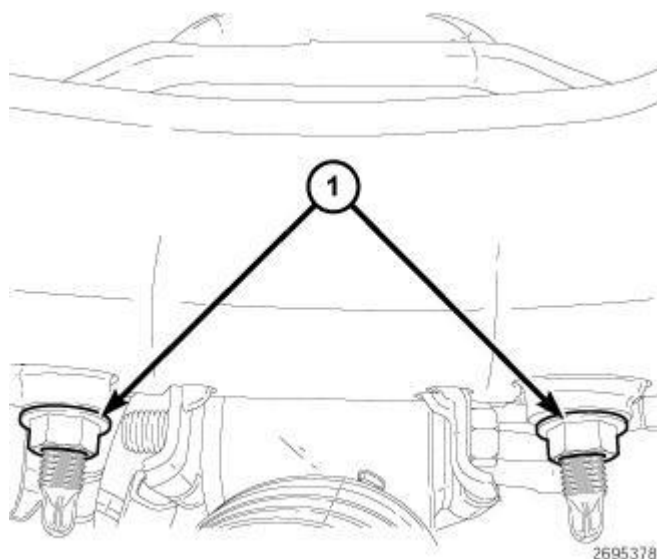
RIGHT LOWER ENGINE MOUNT RETAINING NUTS
